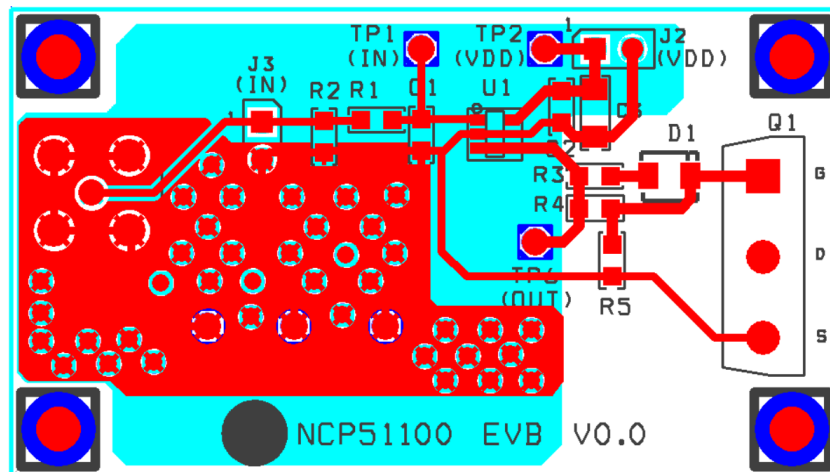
Printed Circuit Board (Top & Bottom Layer)
